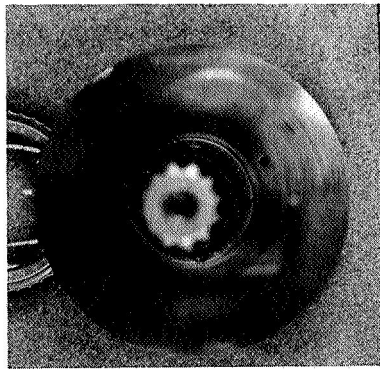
K-82 Shoes and Thrust Bearings and K-96 Swash Plate After 50 Hours at 500°F With MLO 60-294 Mineral Oil
